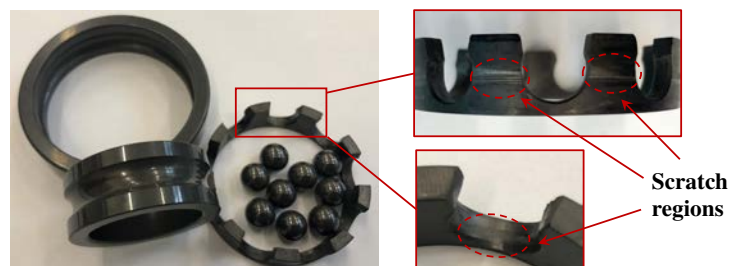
Removed silicon nitride full ceramic ball bearing and its components.
